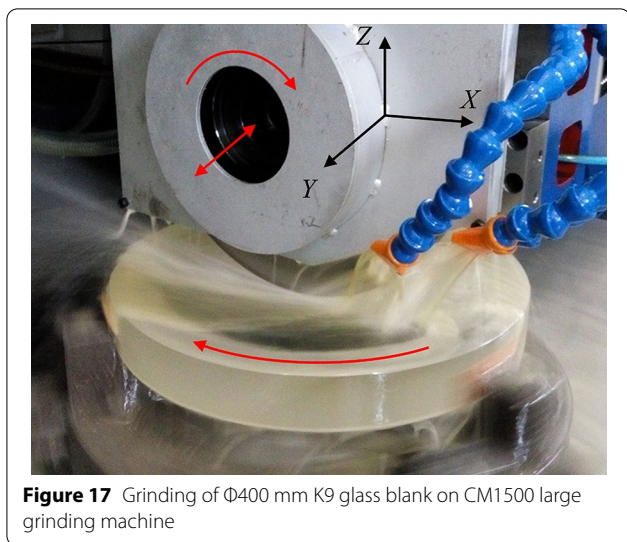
Grinding of $\Phi 400$ mm K9 glass blank on CM1500 large grinding machine
